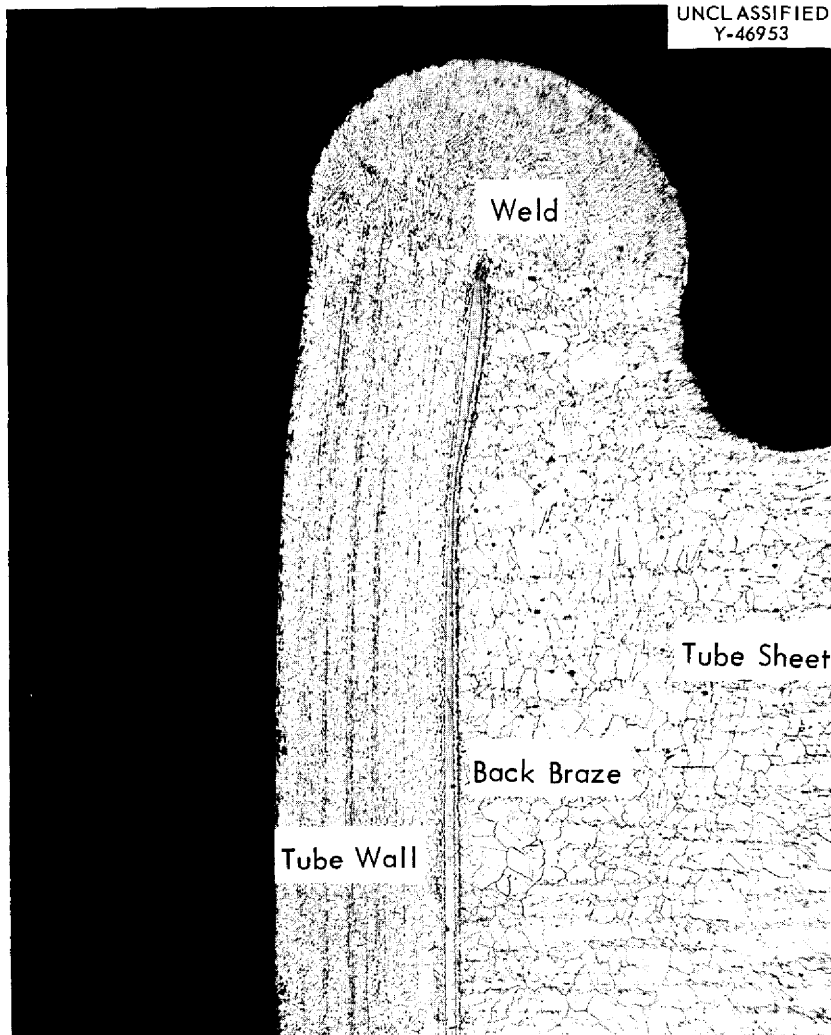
Tube-To-Header Joint from Sample Heat Exchanger. Note excellent weld contour, good weld penetration, and excellent flow of brazing alloy to root of weld. 27X.
